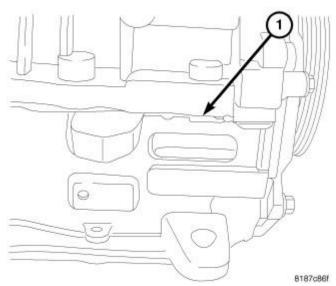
Pry Point 2 Courtesy of CHRYSLER GROUP, LLC
